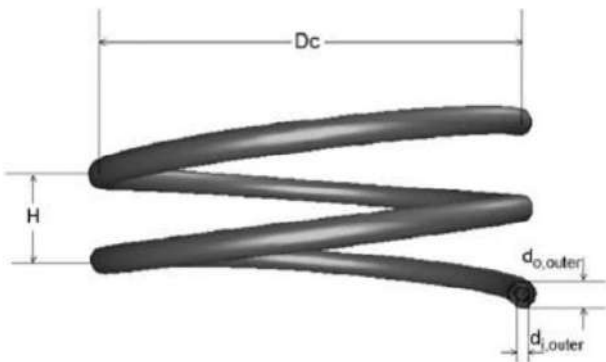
Dimensional Representation of Tubein tube Helical Coil Hear exchanger
